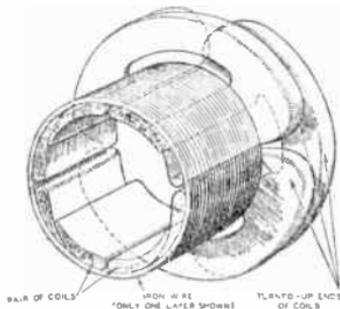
TYPICAL YOKE ASSEMBLY CUT IN HALF TO SHOW SECTIONS OF WINDINGS.
